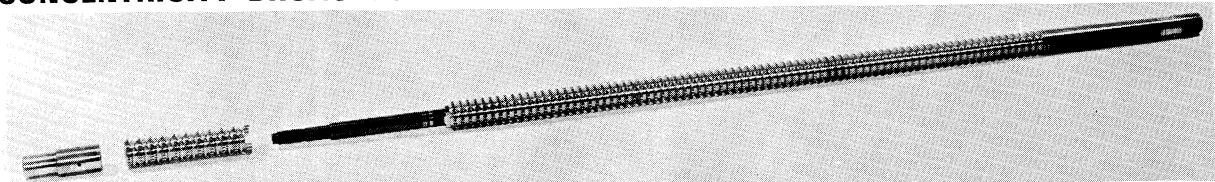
An 80-in. long Red Ring Concentricity broach in exploded view to show the finishing shell section.
